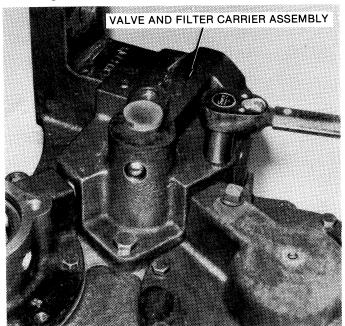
Removing or Installing screws on Valve and Filter Assembly.
